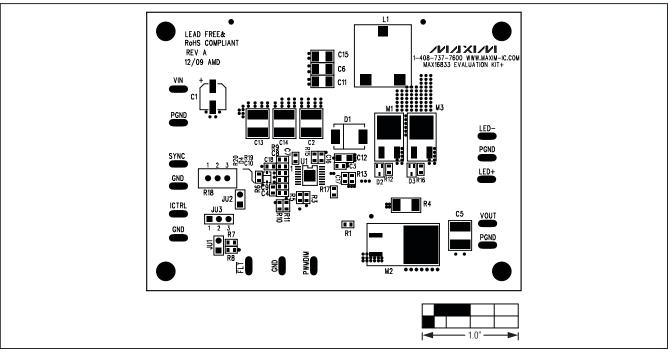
MAX16833 EV Kit Component Placement Guide—Component Side
